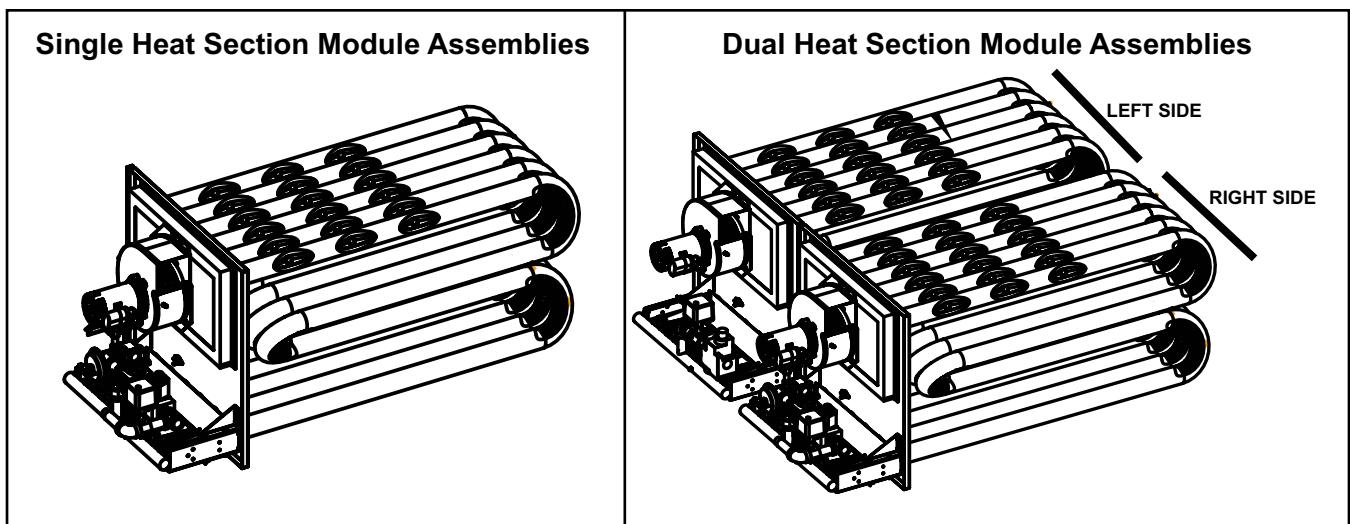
Heat Section Module Assemblies (Refer to Table 17)
